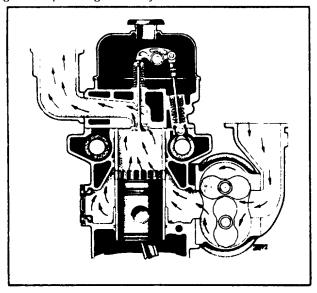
Air Intake System Through Blower and Engine (In-line Engine)
